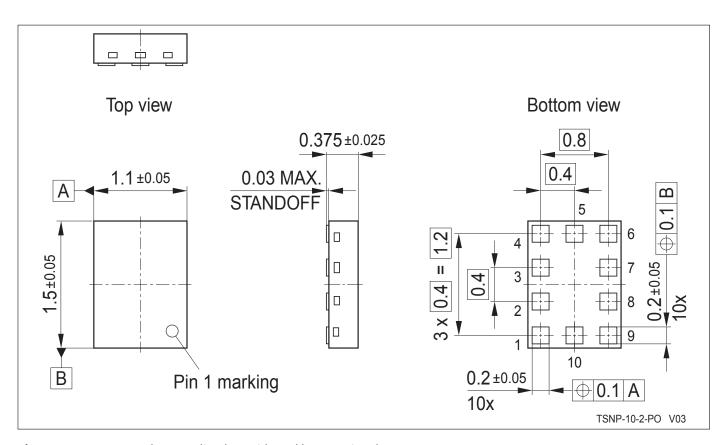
TSNP-10-2 Package Outline (top, side and bottom views)
